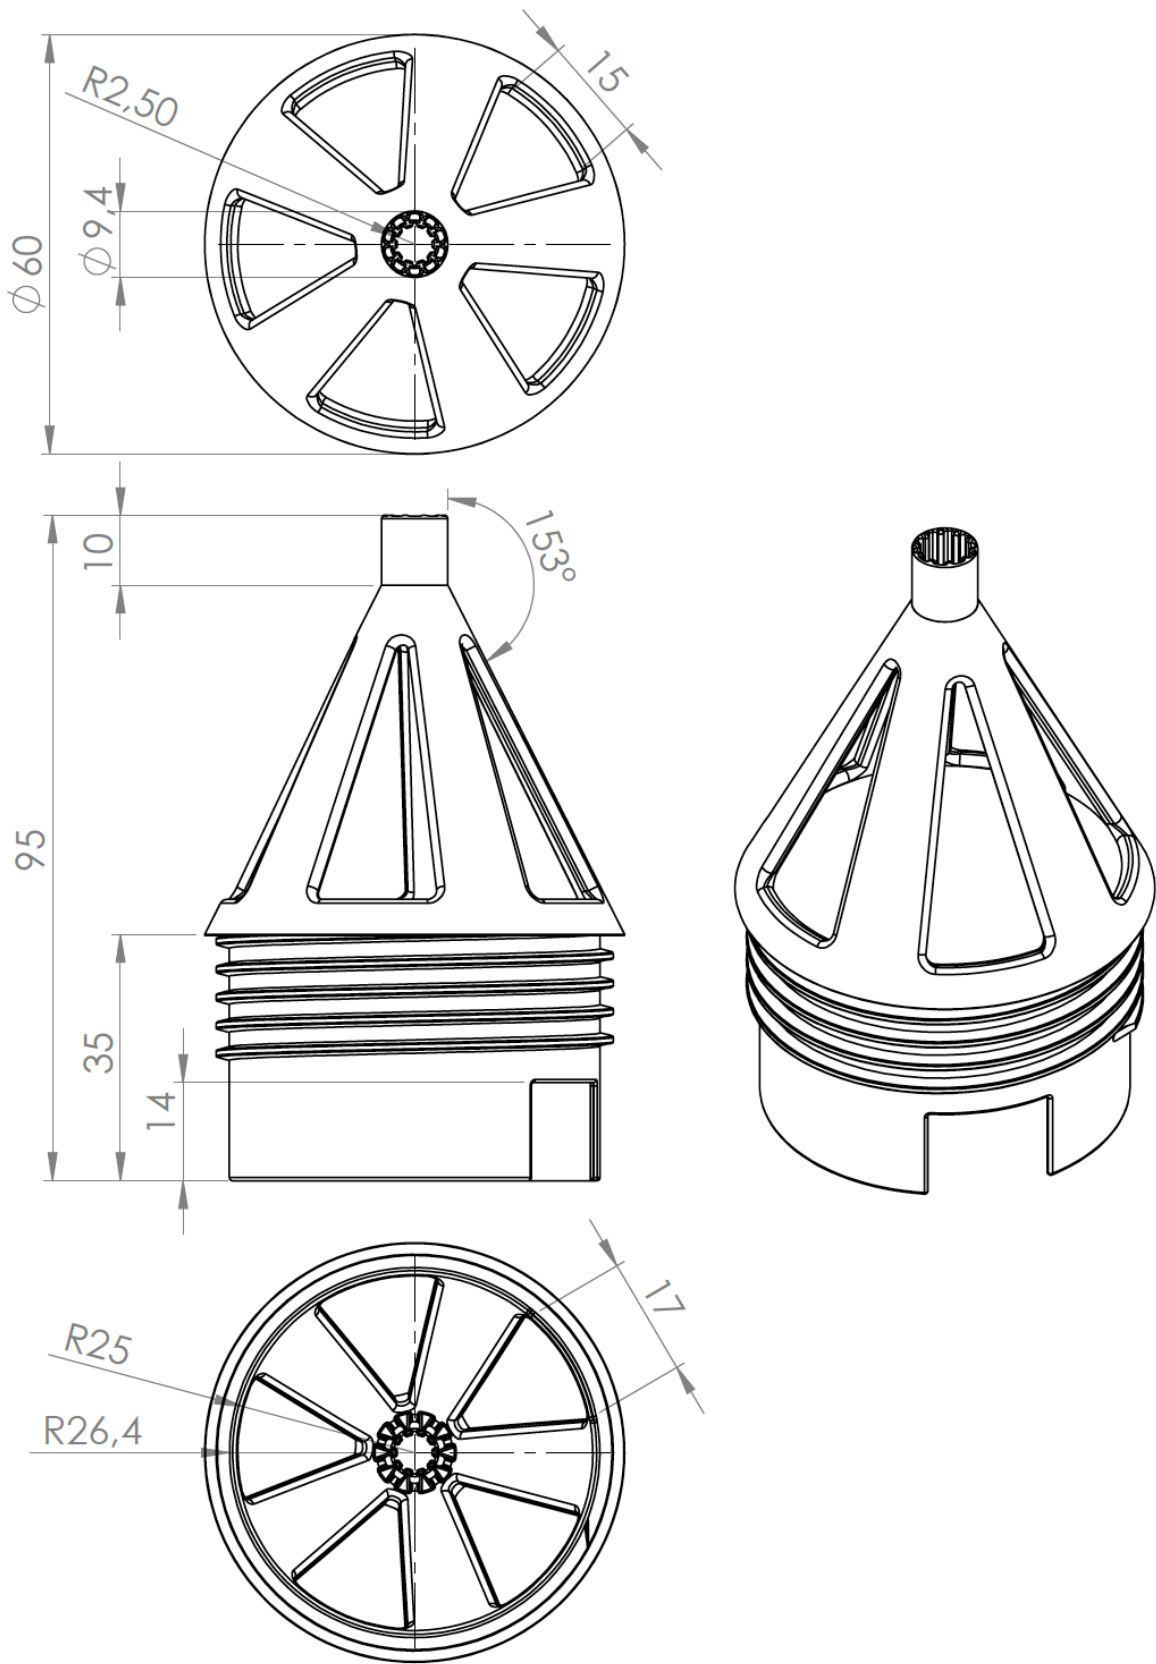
Selection of component views and dimensions (mm), C5 - Cone
